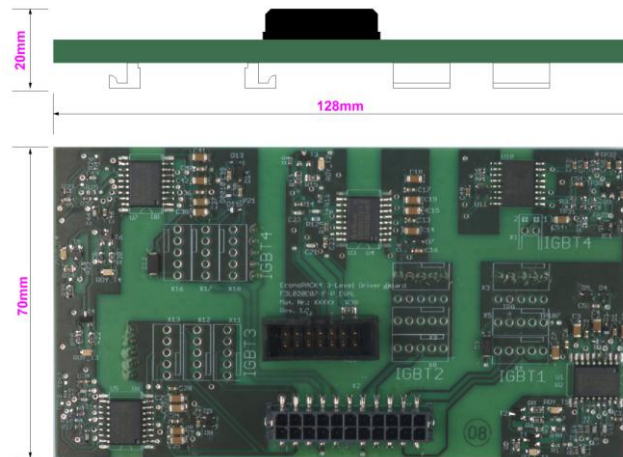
Mechanical dimensions of the F3L020E07-F-P_EVAL
